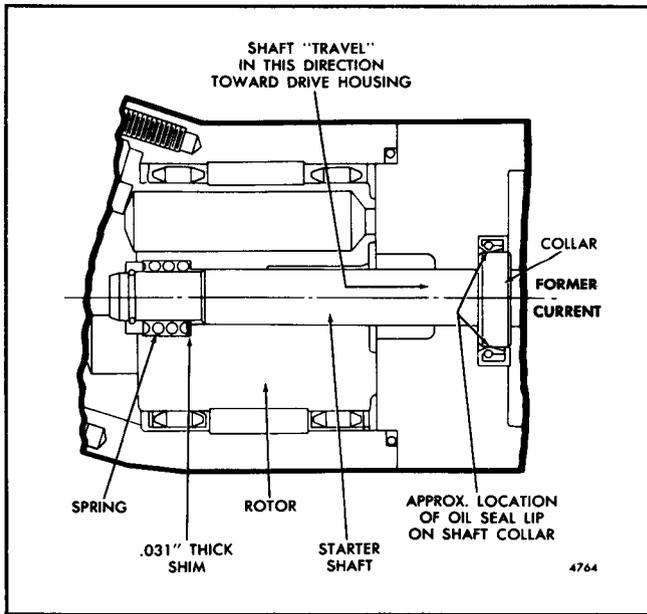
Location of Starter Shaft Compression Spring Shim(s)
